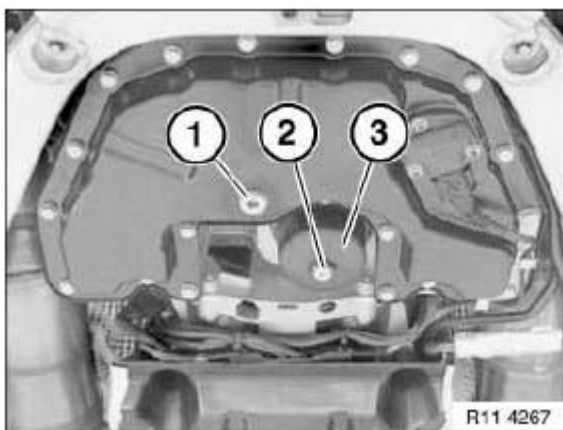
Identifying Oil Drain Plug, Oil Filter Cover And Oil Filter Cap
